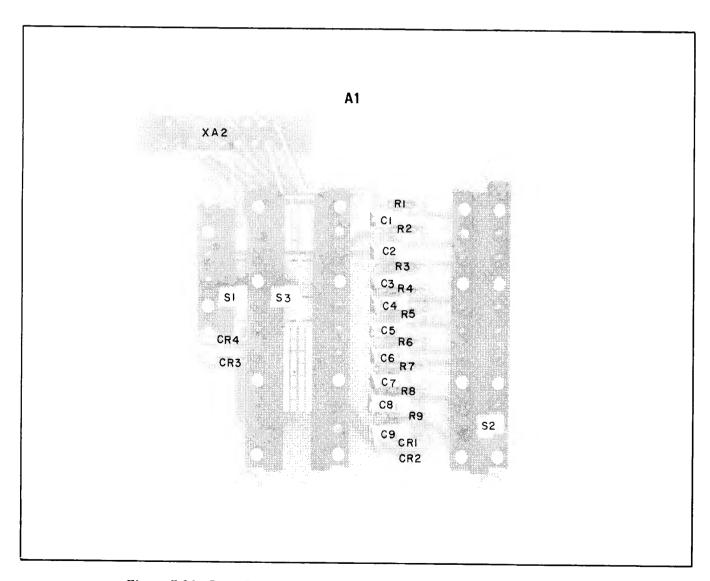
Parts Location for Front Panel Assembly A1 and A2 (1 of 2)
